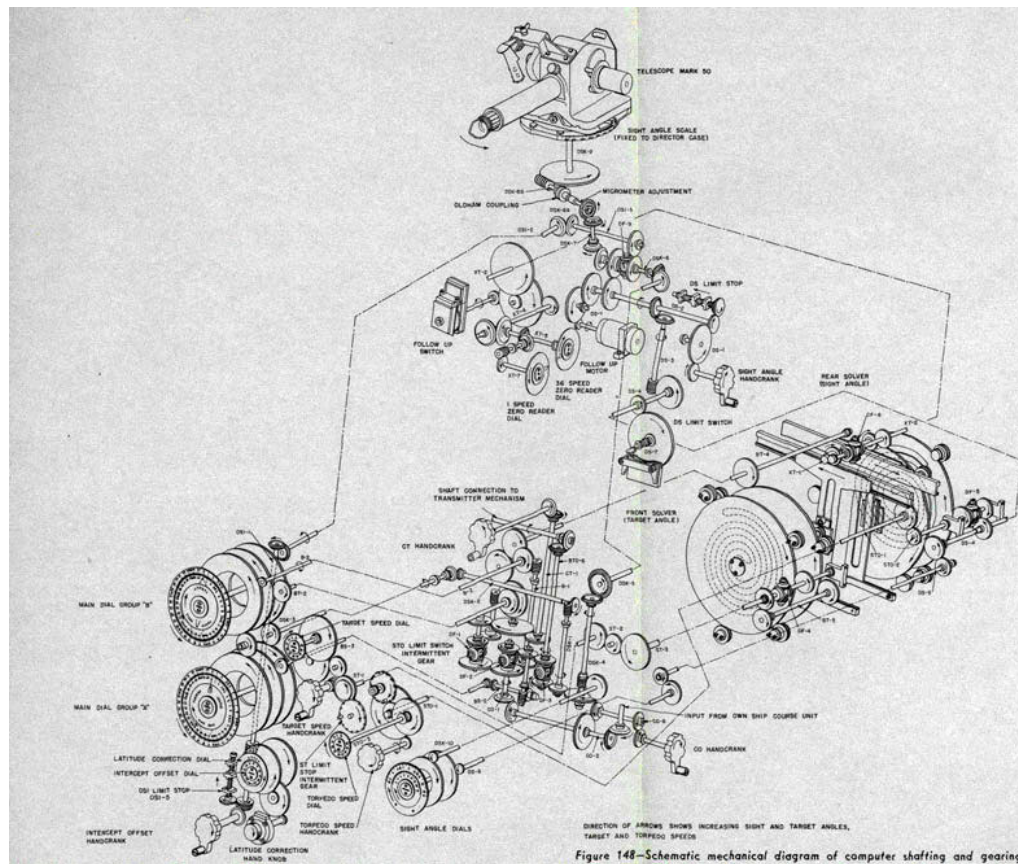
Schematic mechanical diagram of computer shafting and gearing.
